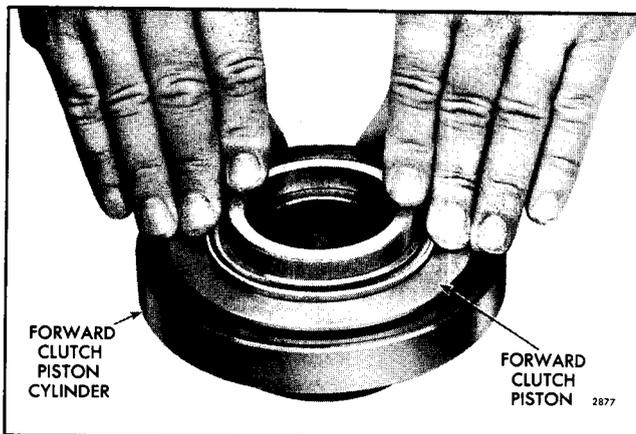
Installing Forward Clutch Piston in Clutch Piston Cylinder
